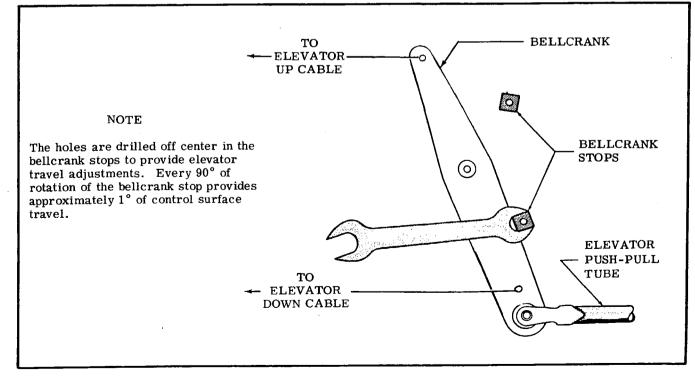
Travel Stops on Elevator Rear Bellcrank
